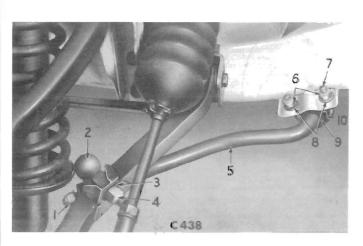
Anti-roll bar link attachments to lower suspension wishbone
